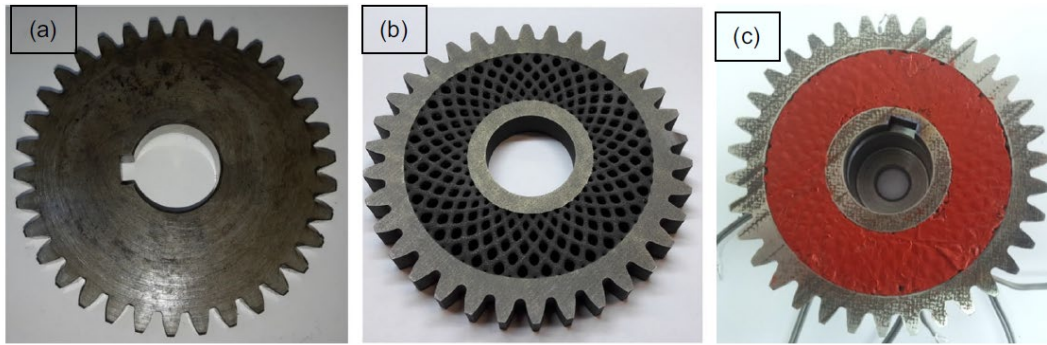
Gears used for sound pressure measurement experiments: (a) solid body gear, (b) lattice structure gear, and (c) lattice structure with a polymer inserted.³⁰
